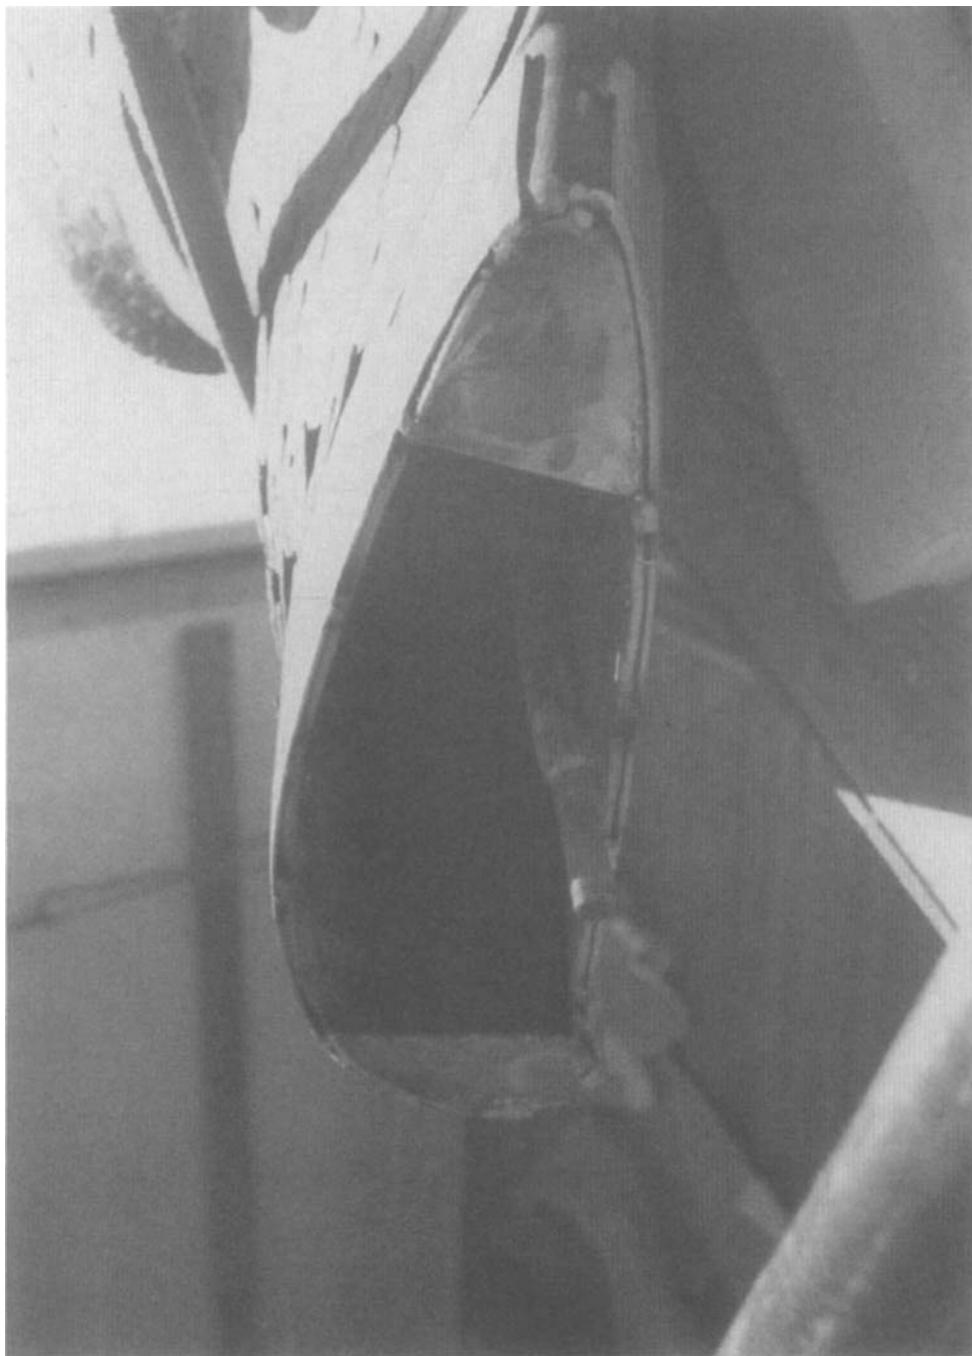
Detail of the body end of wing, showing the threaded end of the new armature. The photograph also shows bronze shims and partial end-plates, tack-welded in place, to achieve a snug fit of the wing in the body.
